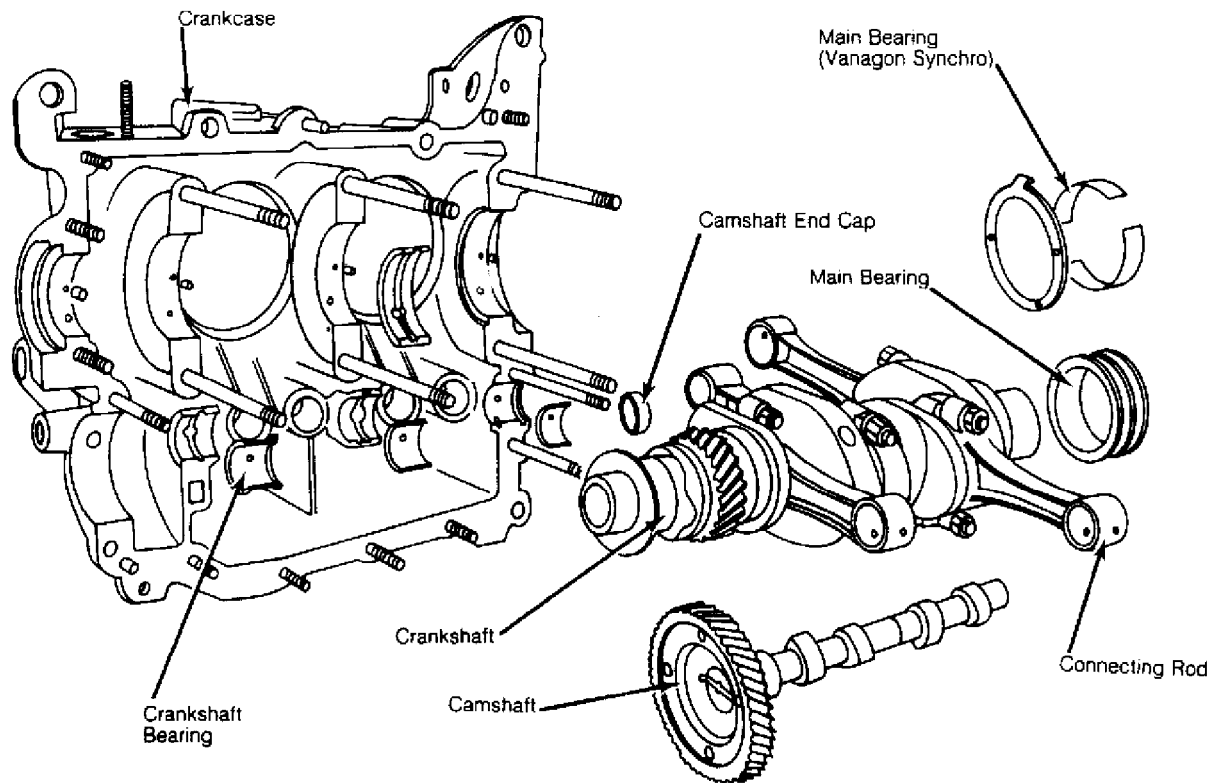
Exploded View of Crankcase, Crankshaft & Camshaft Assembly
